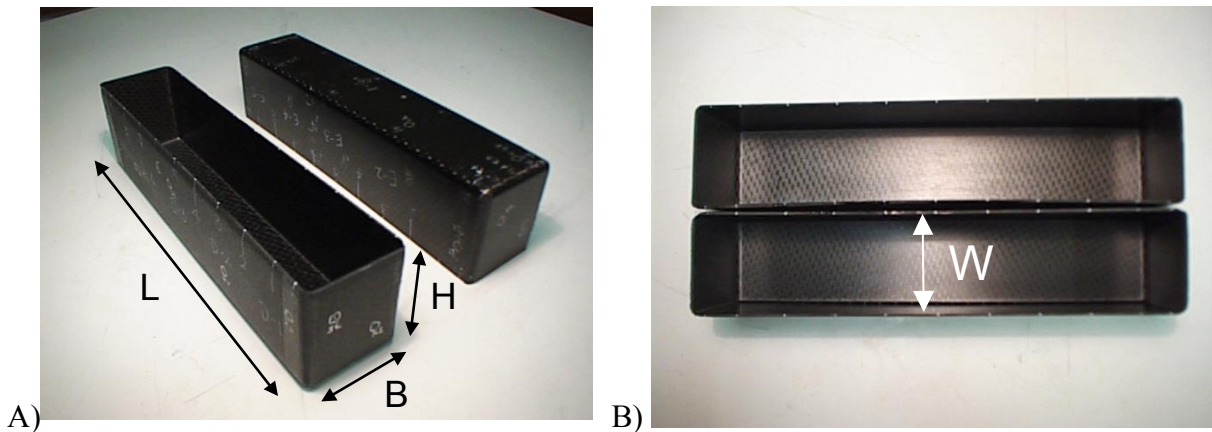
A) General view of ribs, B) Top view of ribs. Approximate dimensions: web width (B) 67.8 mm, flange height (H) 77.6 mm, and length (L) 310 mm.
